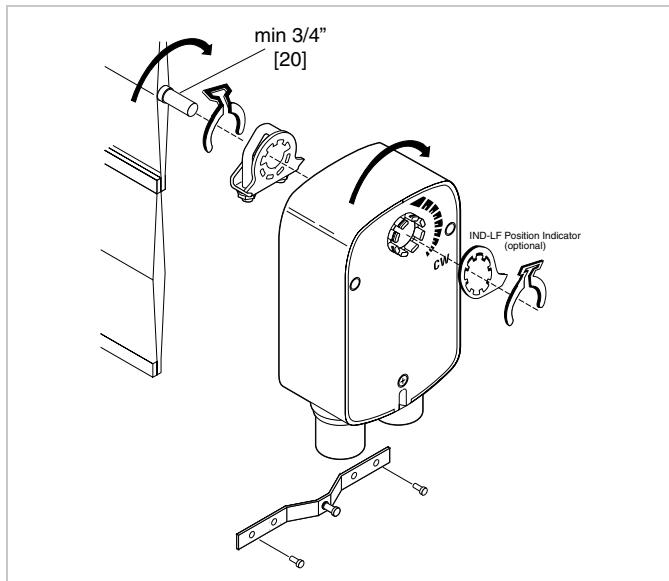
FIGURE D – Standard Mounting (Dimensions in Inches [mm])
